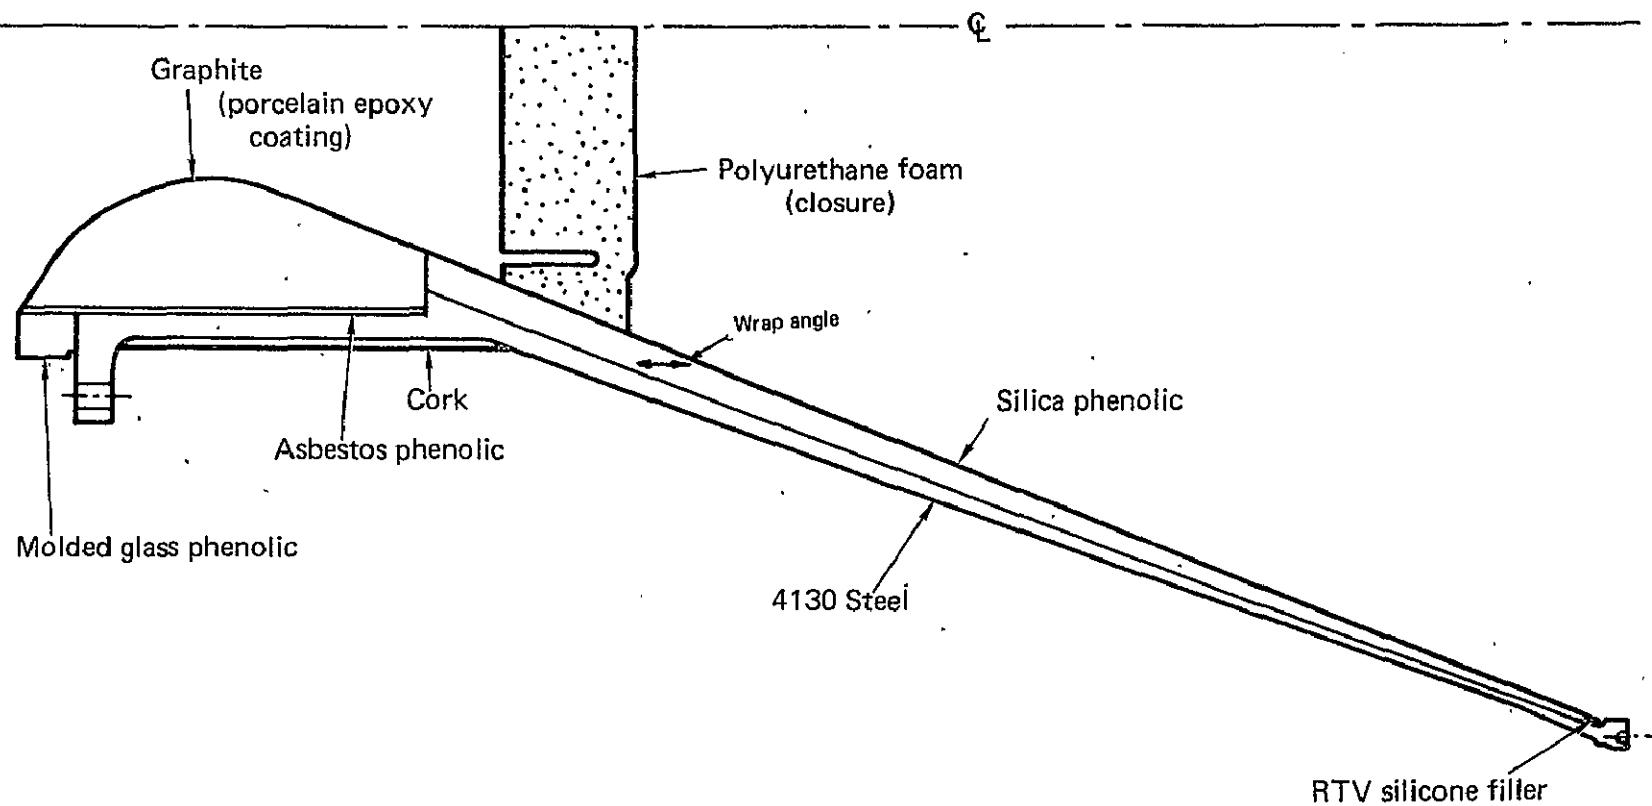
CASTOR IIA NOZZLE MATERIALS
